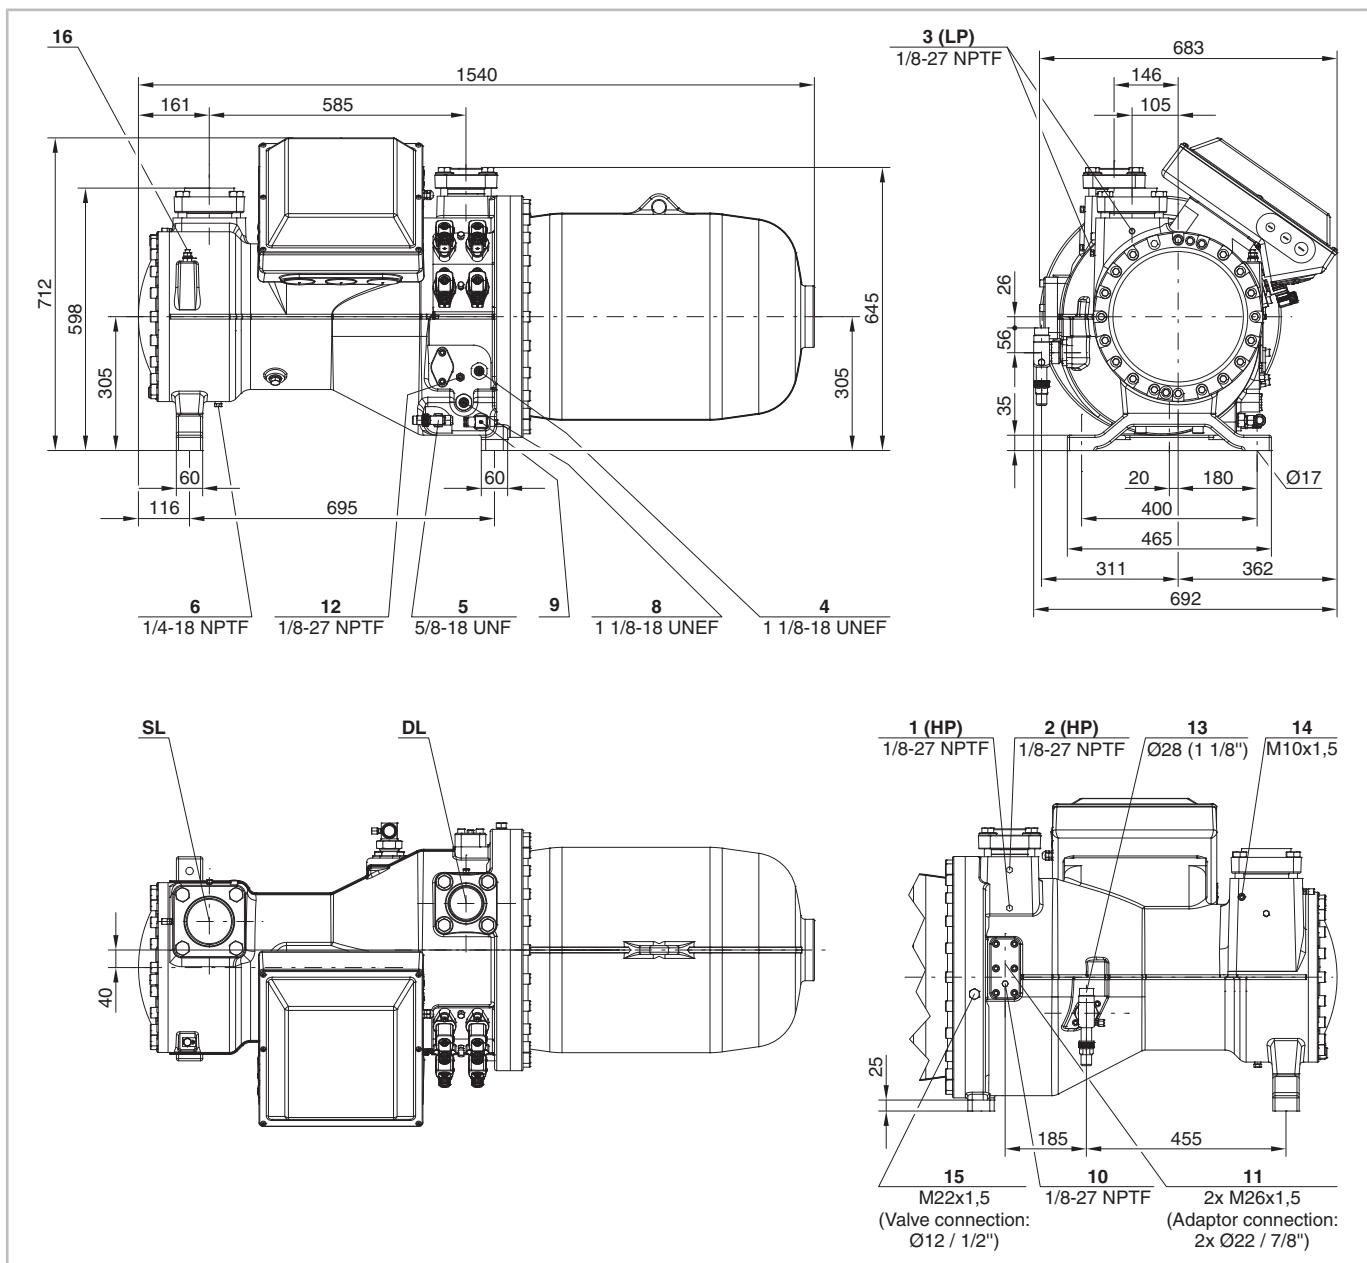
Dimensional drawing CSH8553-80Y .. CSH8593-180(Y)
